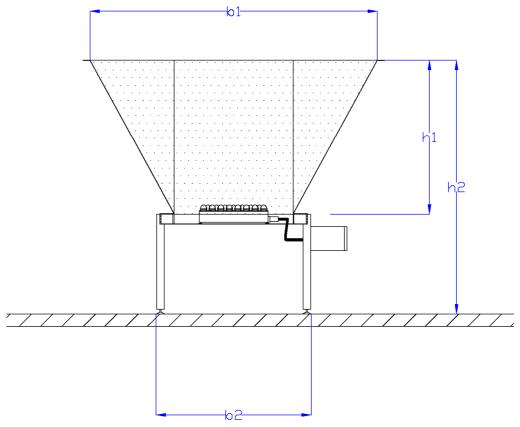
Outer dimensions of the support stand and enclosure (example: MFAS)
